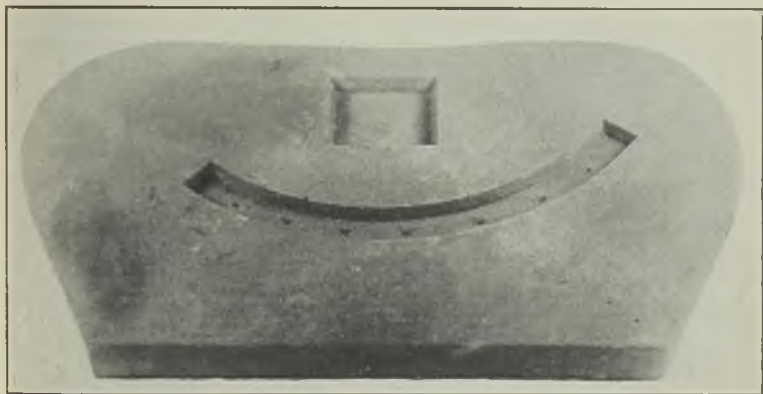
CORE FOR LOCATING WOODEN JIG FOR NOZZLE CORE ASSEMBLY.
